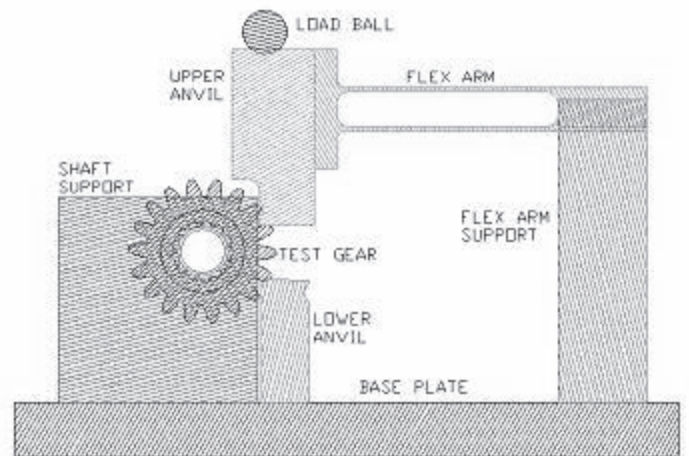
Schematic of tooth bending fatigue fixture at Gear Research Institute.
